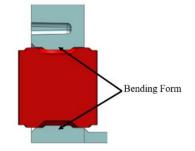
Design of 1st Ø6 mm Rollers Assembly Unit
